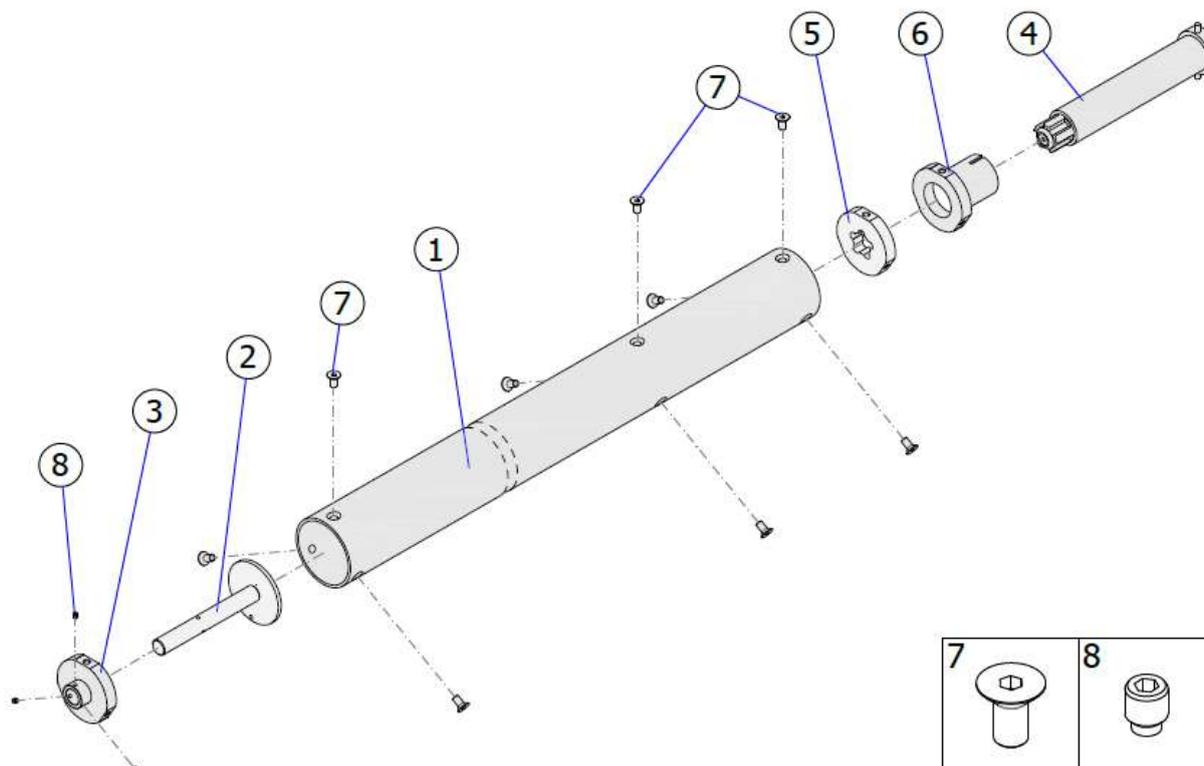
ISOiK-Ok60-01.19 [winding shaft with internal drive]
